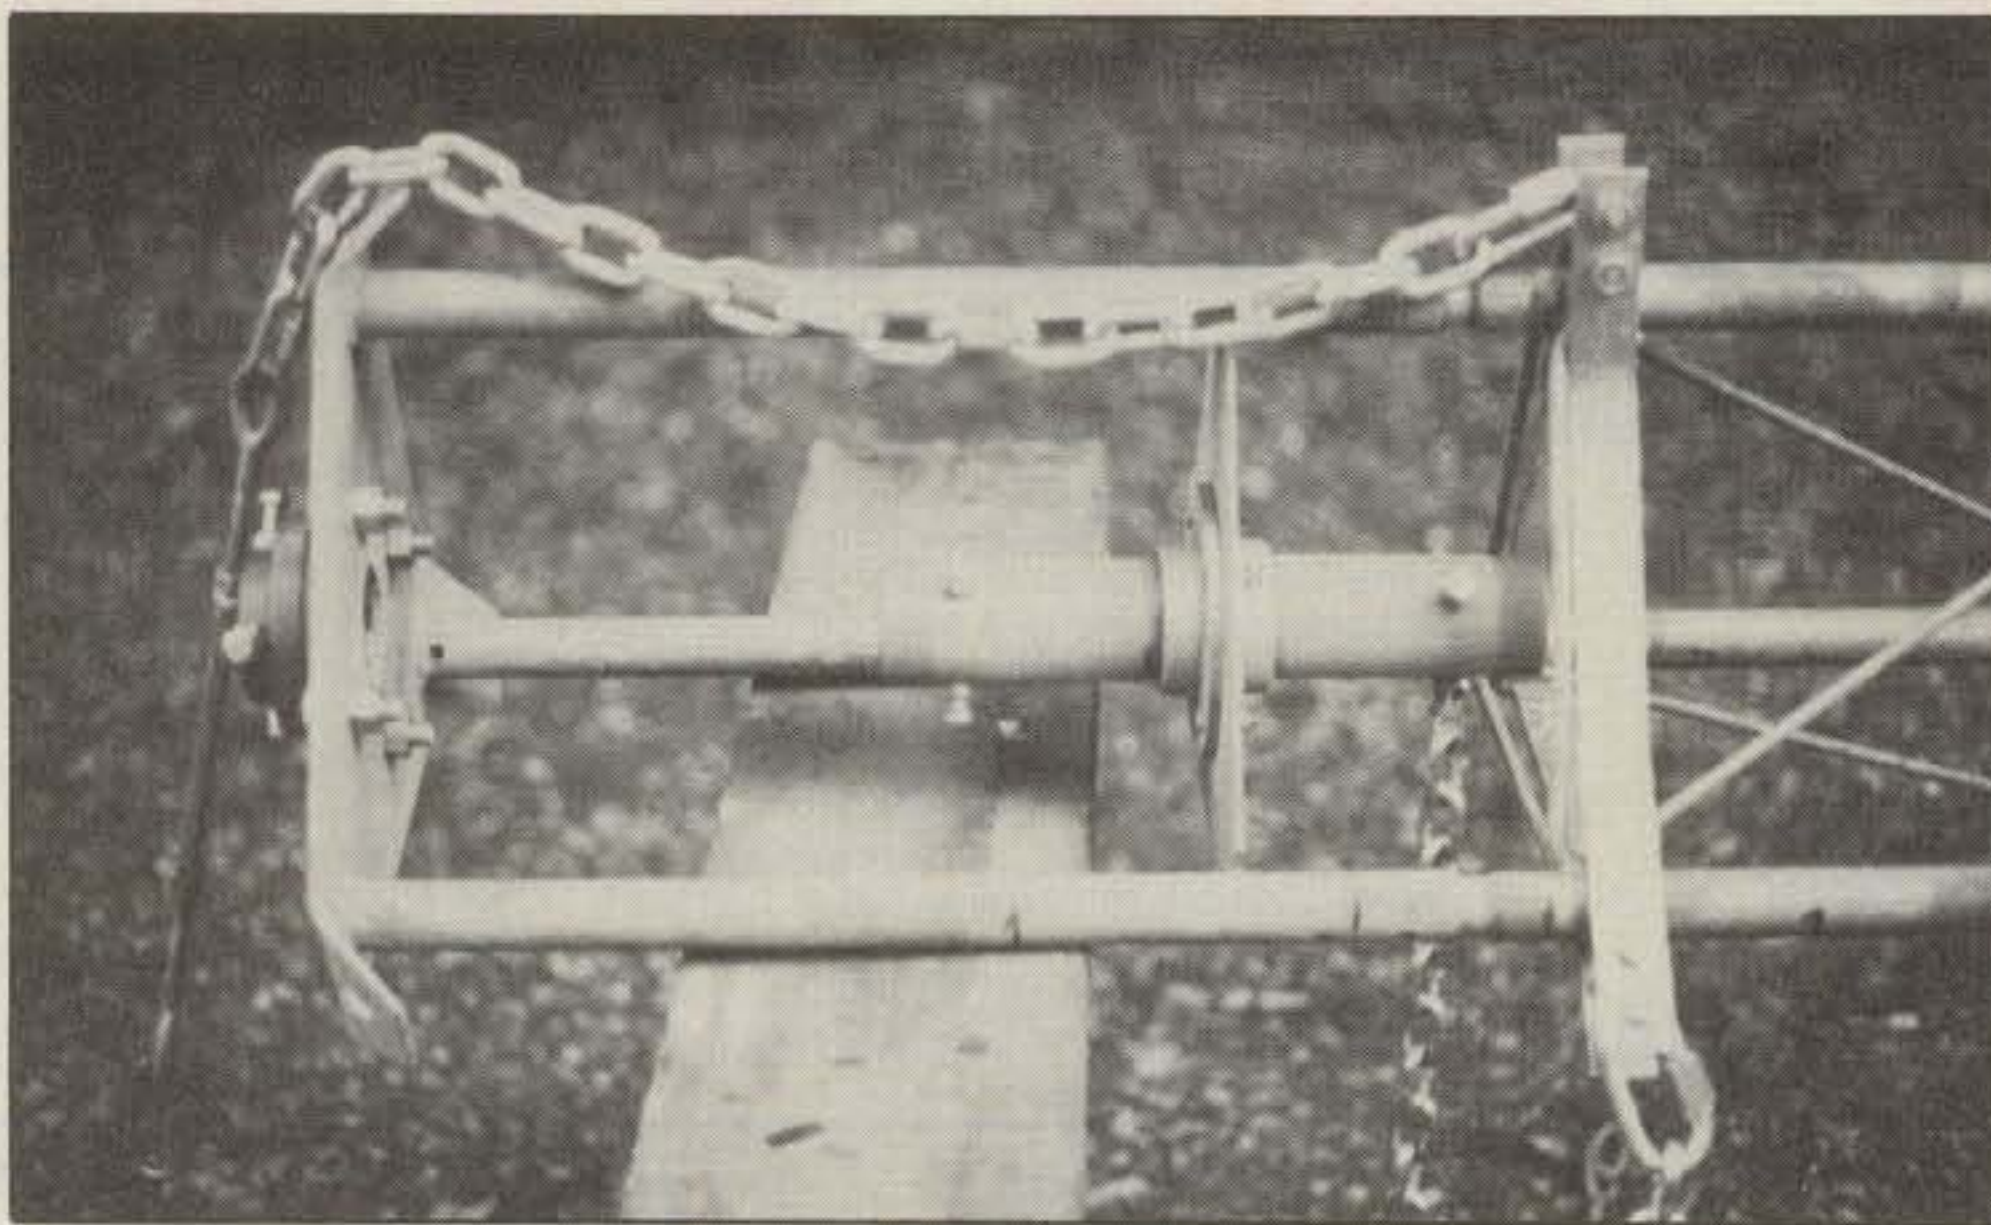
Lower part of the inverted section showing thrust bearing, opposing pinning/clamping nipple flange design, and guy assembly brackets with chain and turnbuckles as seen in photo 1.
